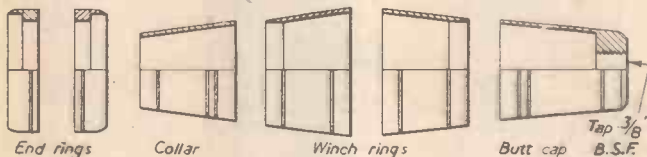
Handle fittings, half sectioned. Scale half full size. Made from brass, coloured and lacquered or plated.
